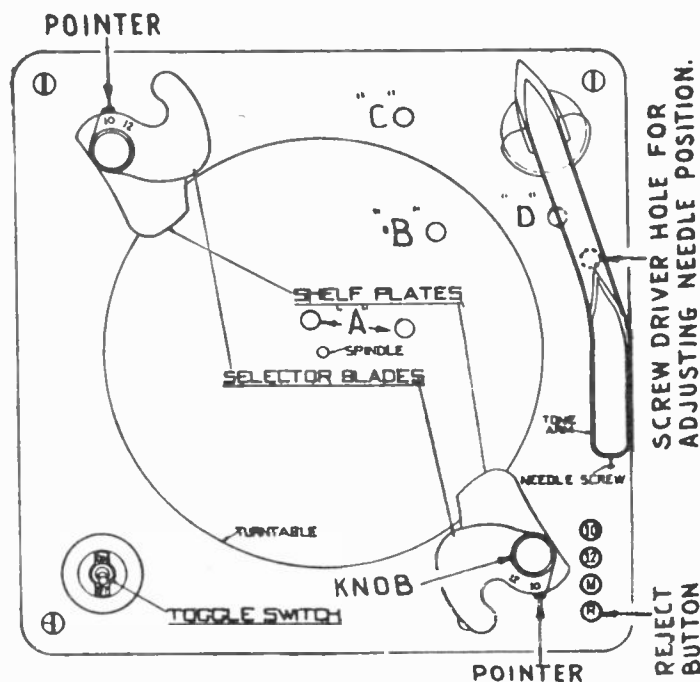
SHOWS SELECTOR BLADES IN POSITION FOR 10-INCH RECORDS.
